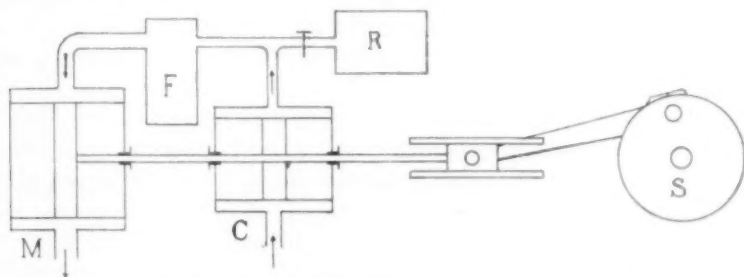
ENGINE FOR COMBUSTION UNDER CONSTANT PRESSURE
